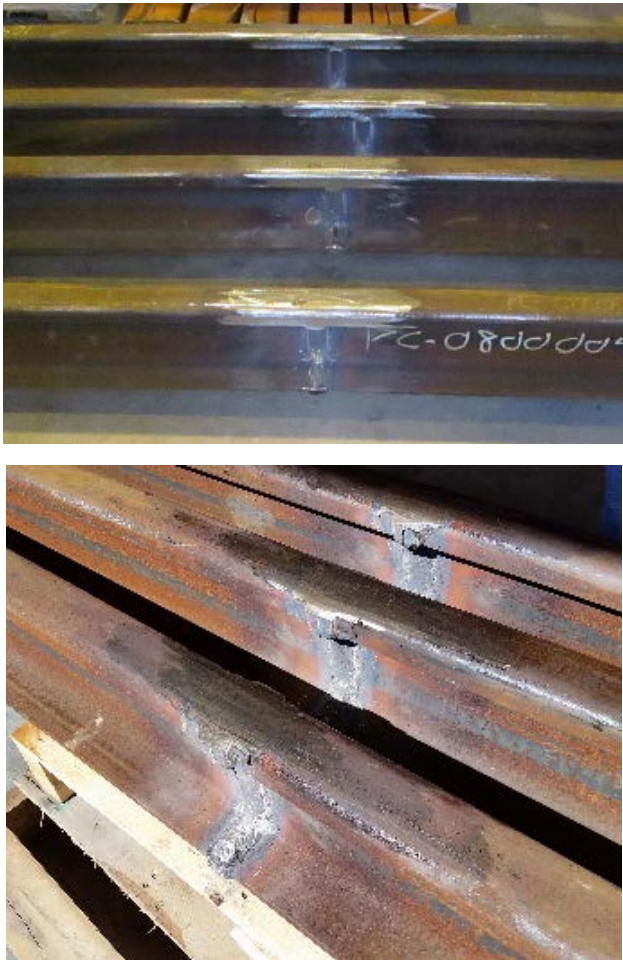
Seven 136RE premium head hardened rails with the welds present at the centers that were sent for laboratory analysis.
